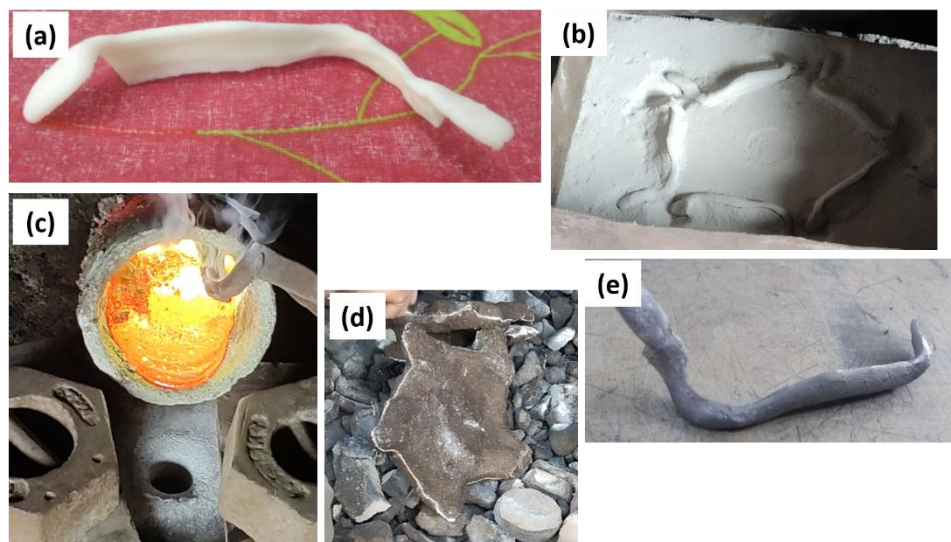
Hybrid approach fabrication (a) 3D printed pattern, (b) shape of pattern in sand casting mould, (c) molten metal pouring into cavity, (d) casted part and (e) final part
